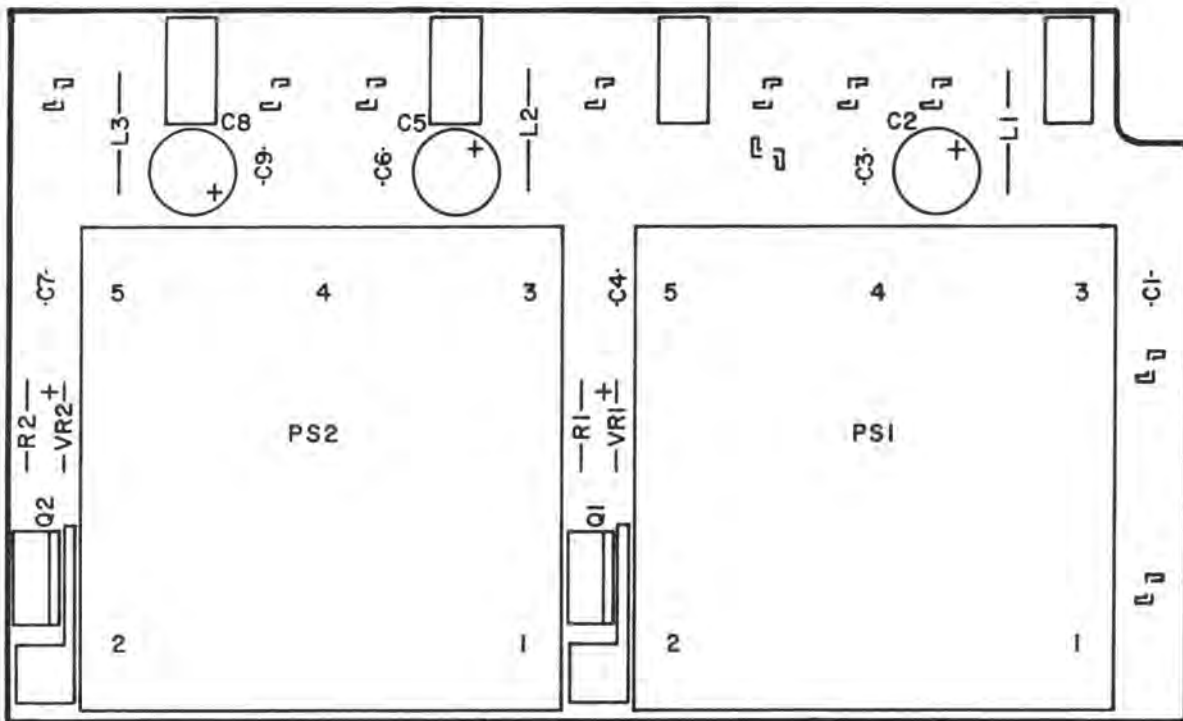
Type 796110 Power Supply P.C. Assembly (A10A1), Location of Components
